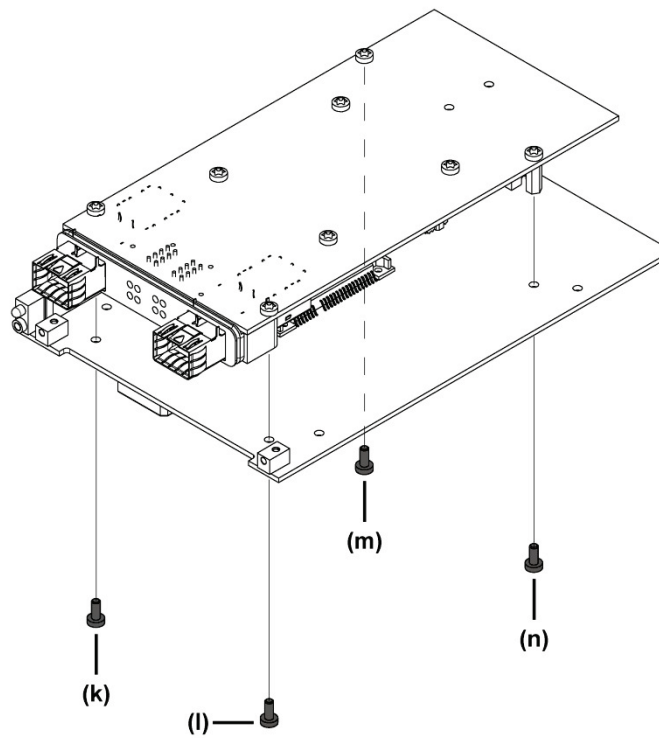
CP3005-SA Board with MMEXT-XMC02 Extension Module and XMC Module
